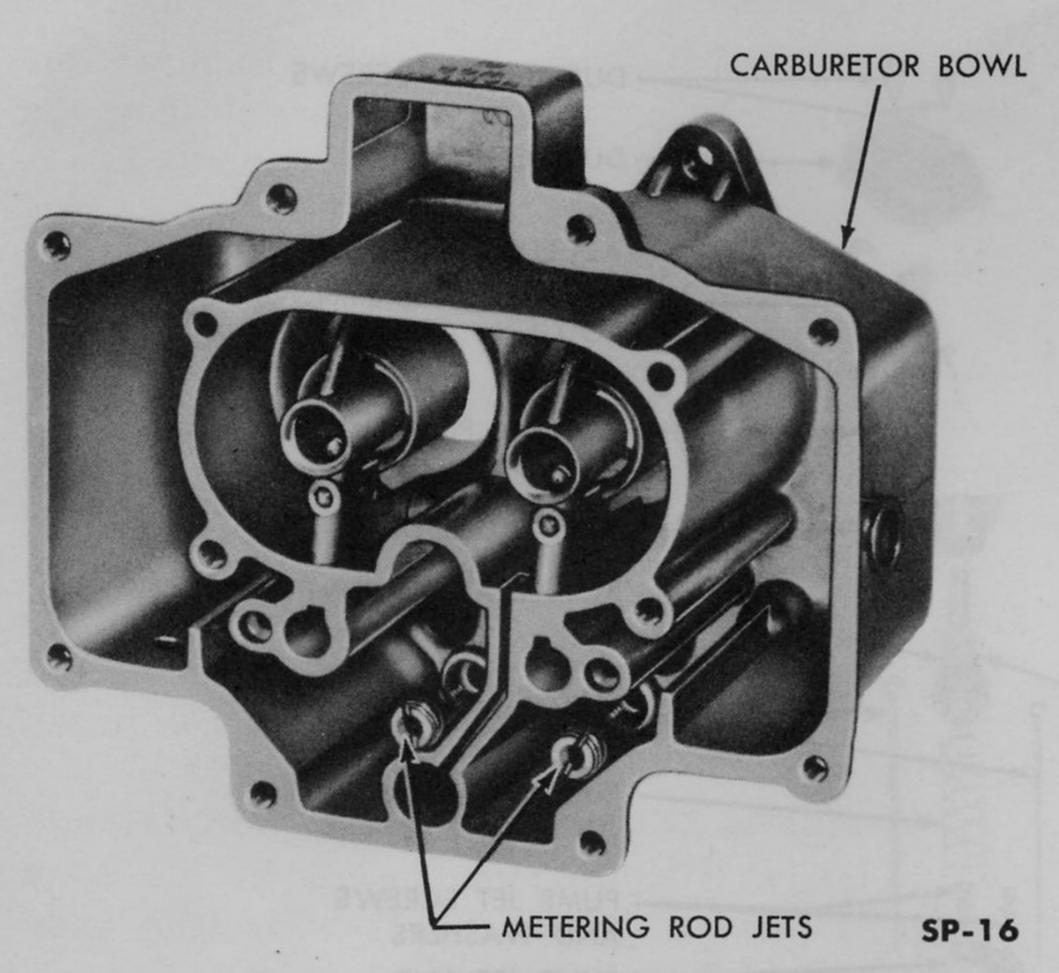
Carburetor Bowl—Exploded View (WCD-723S)
